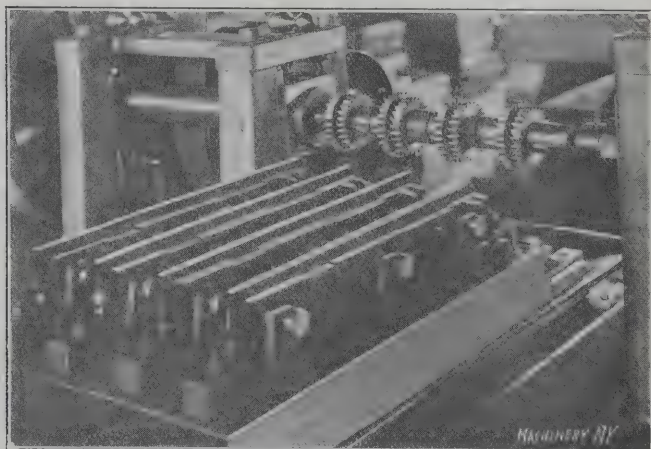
View of Jig on Milling Machine, showing Clearance between it and the Cutters
